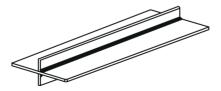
Non-load carrying attachment welded on 12 mm thickness plate
